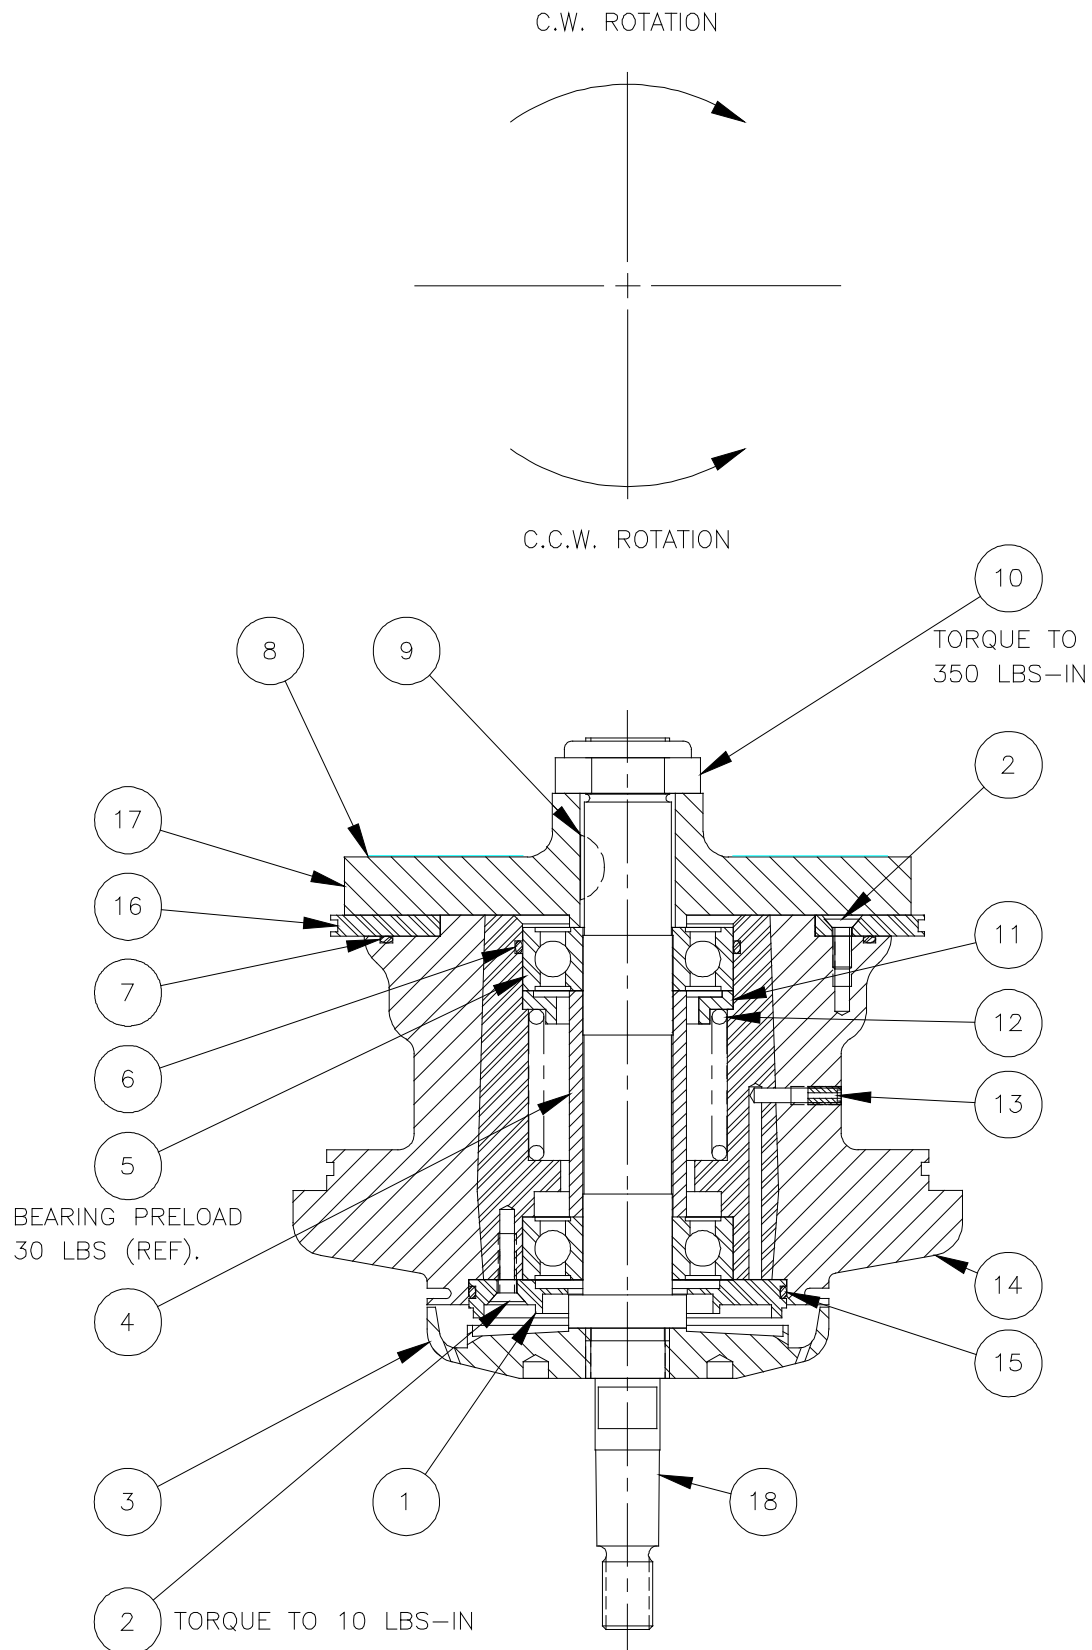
70879-xxx Turbodisk 2 Turbine Cartridge Assembly
